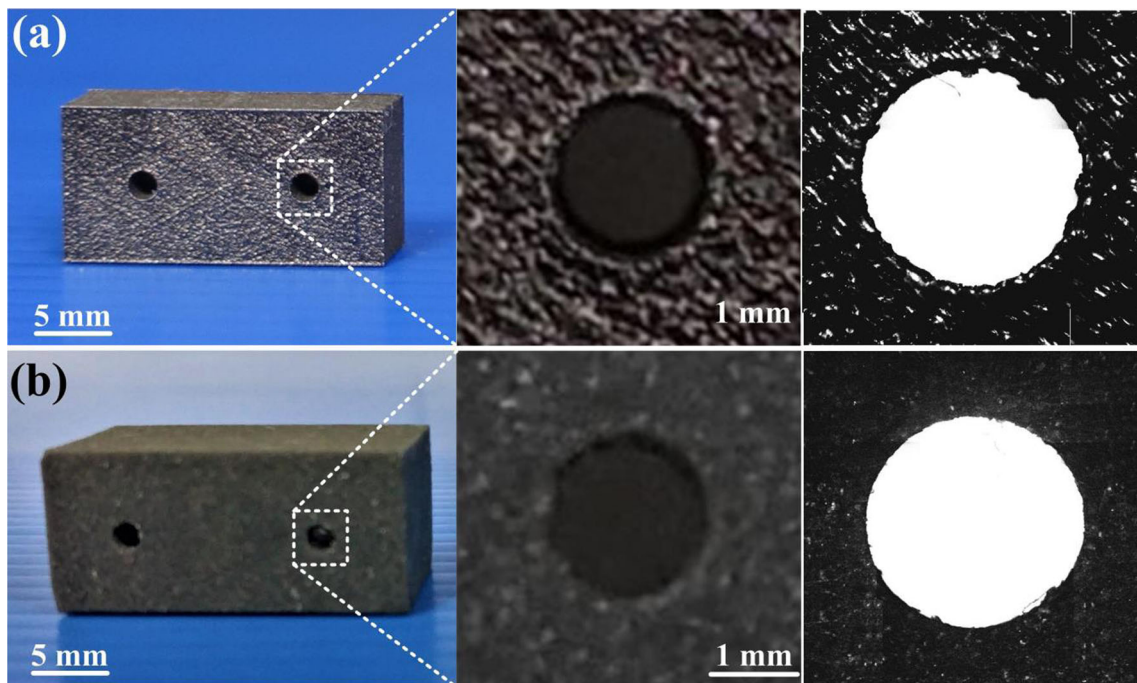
Molds fabricated by (a) DMP and (b) RTT
